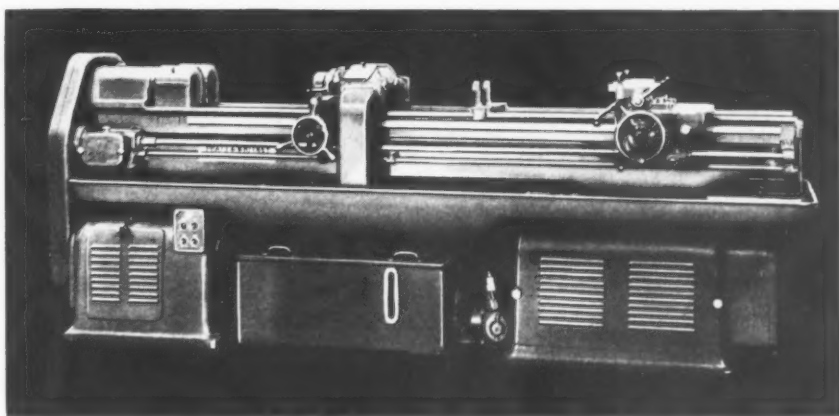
Pratt & Whitney Deep-hole Drilling Machine
